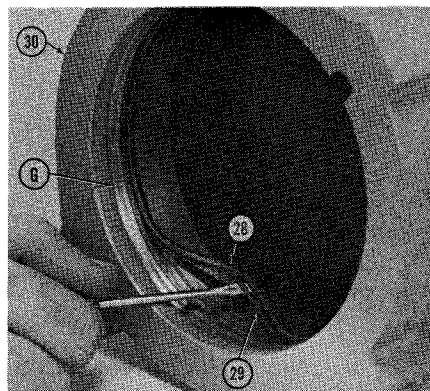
"O" ring (28) and back-up ring (29) are installed in cover (30); be sure back-up ring is to outside (open side) of cover. Groove (G) is for cover retaining snap ring.
